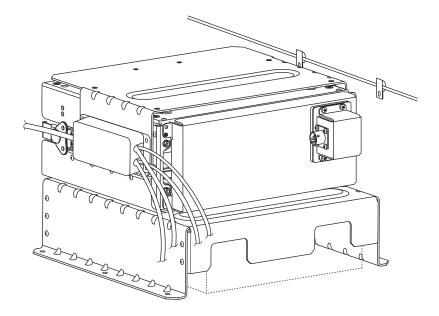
Power supply cover, cradle, power amplifier mounting bracket, interface adaptor, and coaxial cable
